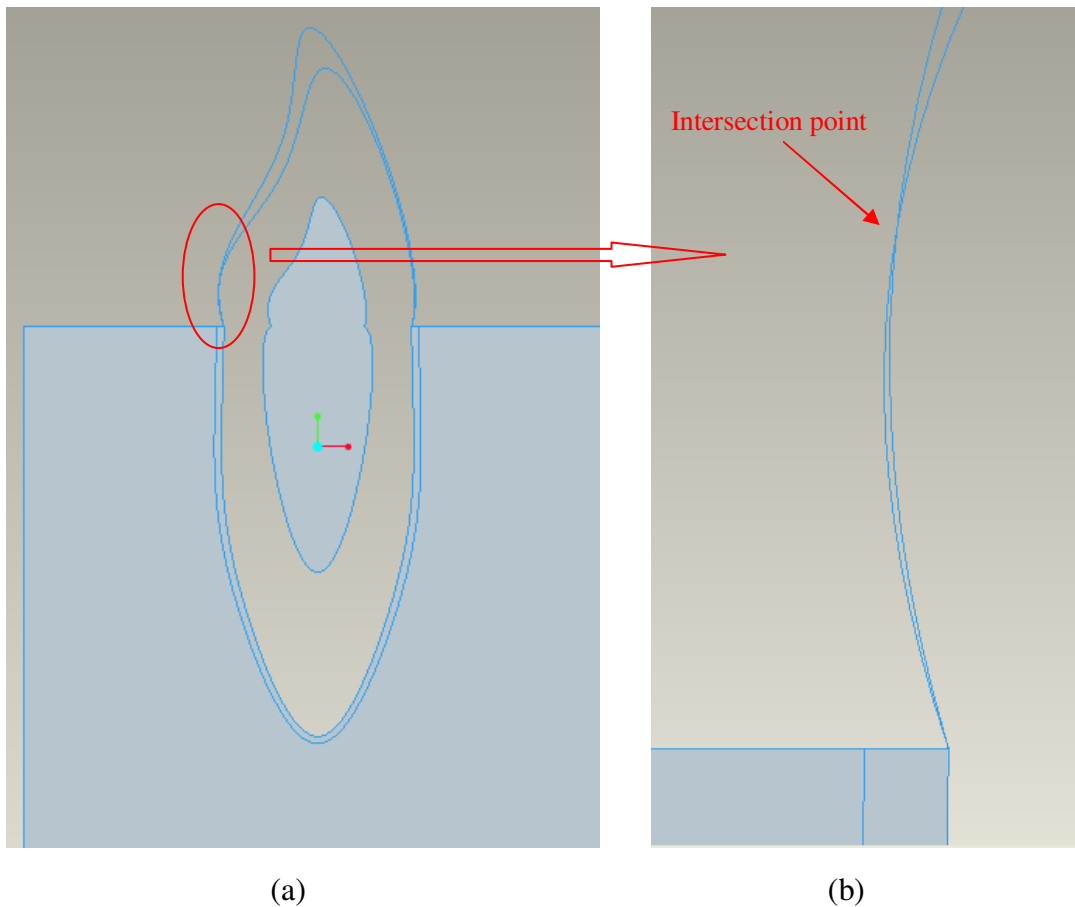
1. (a) Regular; (b) enlarged image for tooth geometry with intersection points
